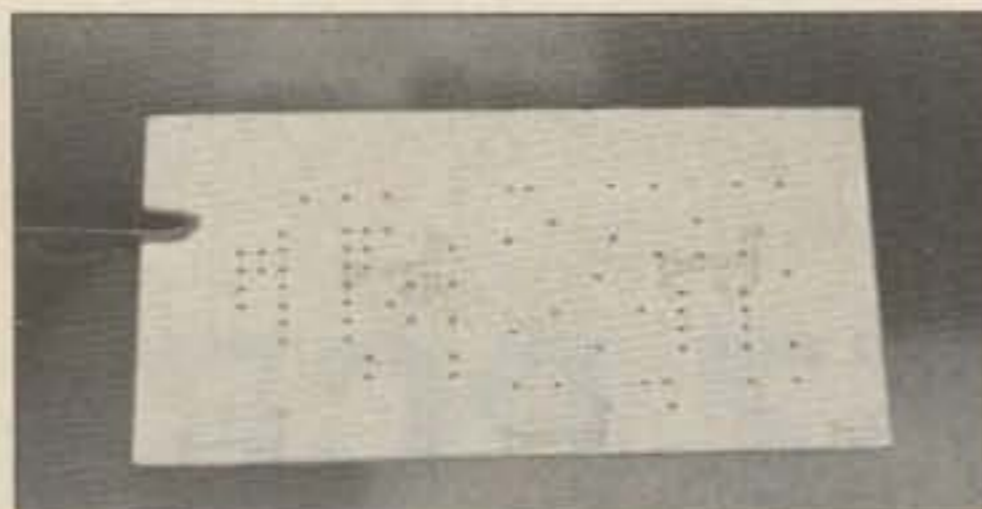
Photo E. Top of drilled PC board showing accurate hole pattern when using perfboard template.
